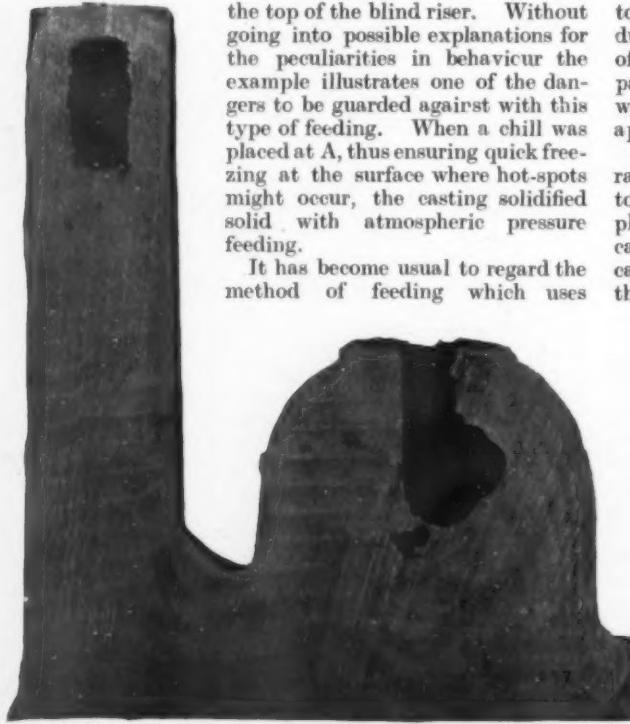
Section of a side head on a casting intended to be fed by atmospheric pressure.
